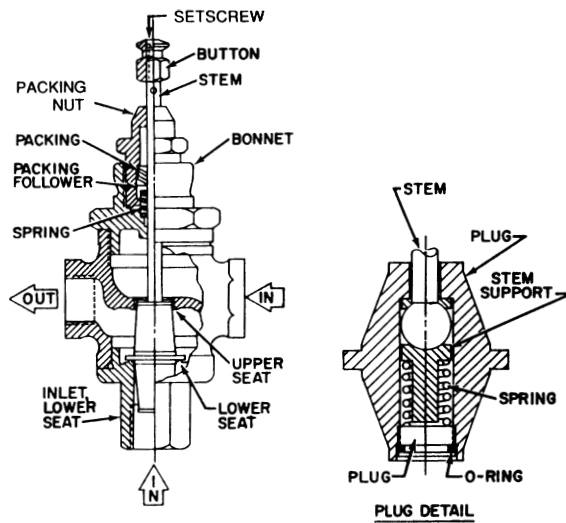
Three-Way V5013A Threaded Body Valve—Cutaway.
